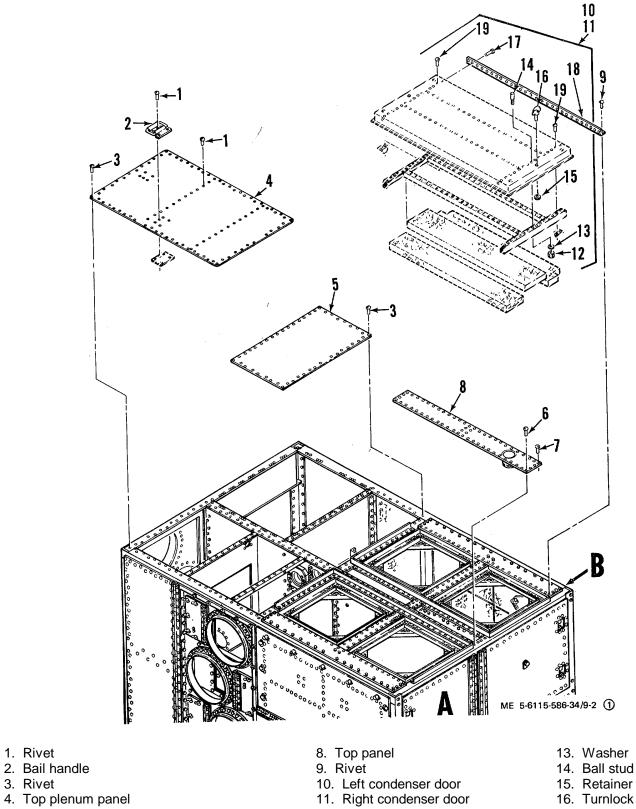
Enclosure assembly, exploded view. (sheet 10 of 10)
